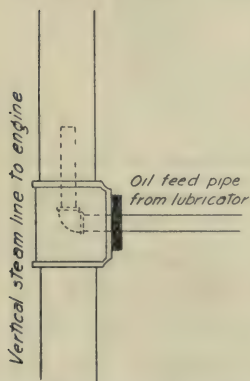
METHOD OF STEAM LINE LUBRICATION
